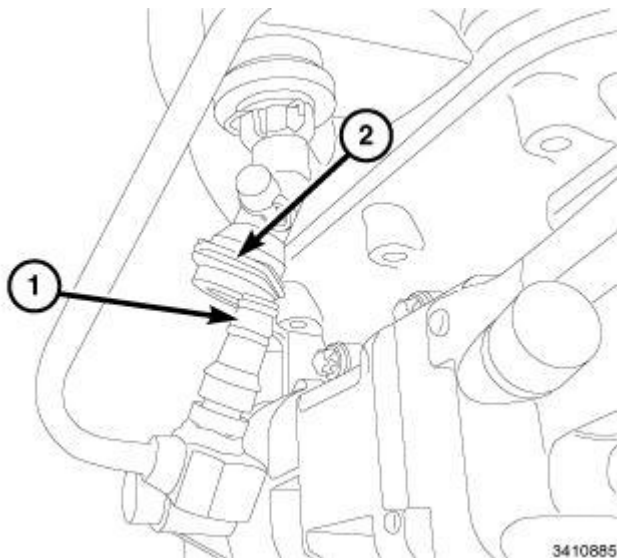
Hydraulic Supply Pipe & Concentric Slave Cylinder
